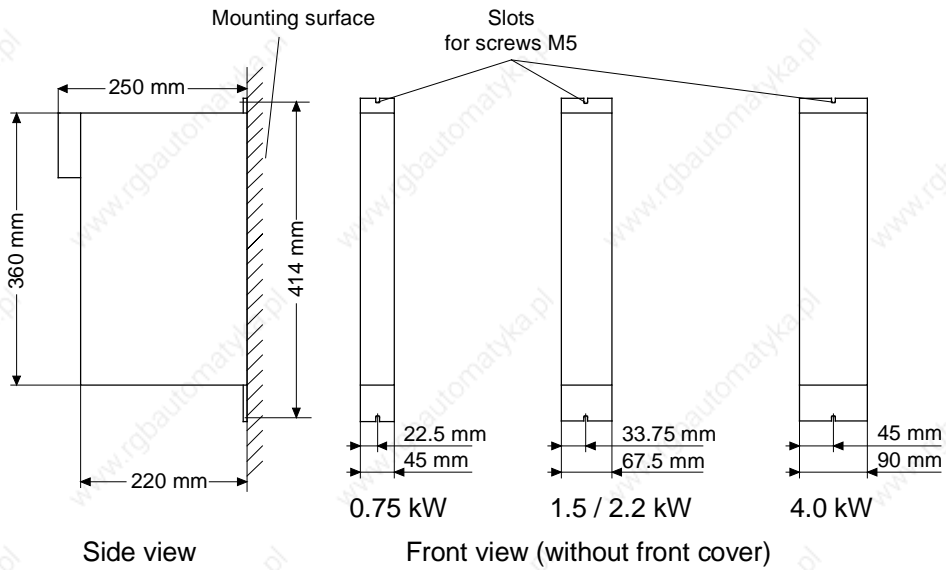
Dimension drawings for housings up to 90 mm wide
